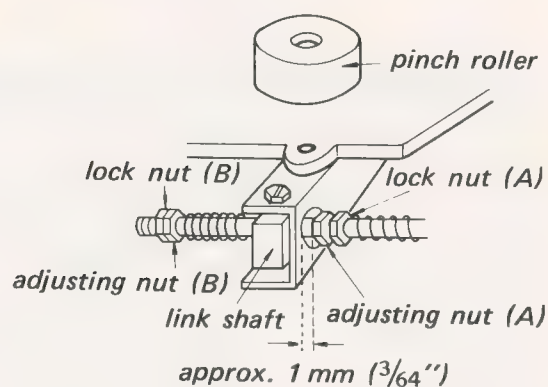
Pinch roller pressure adjustment (1)
